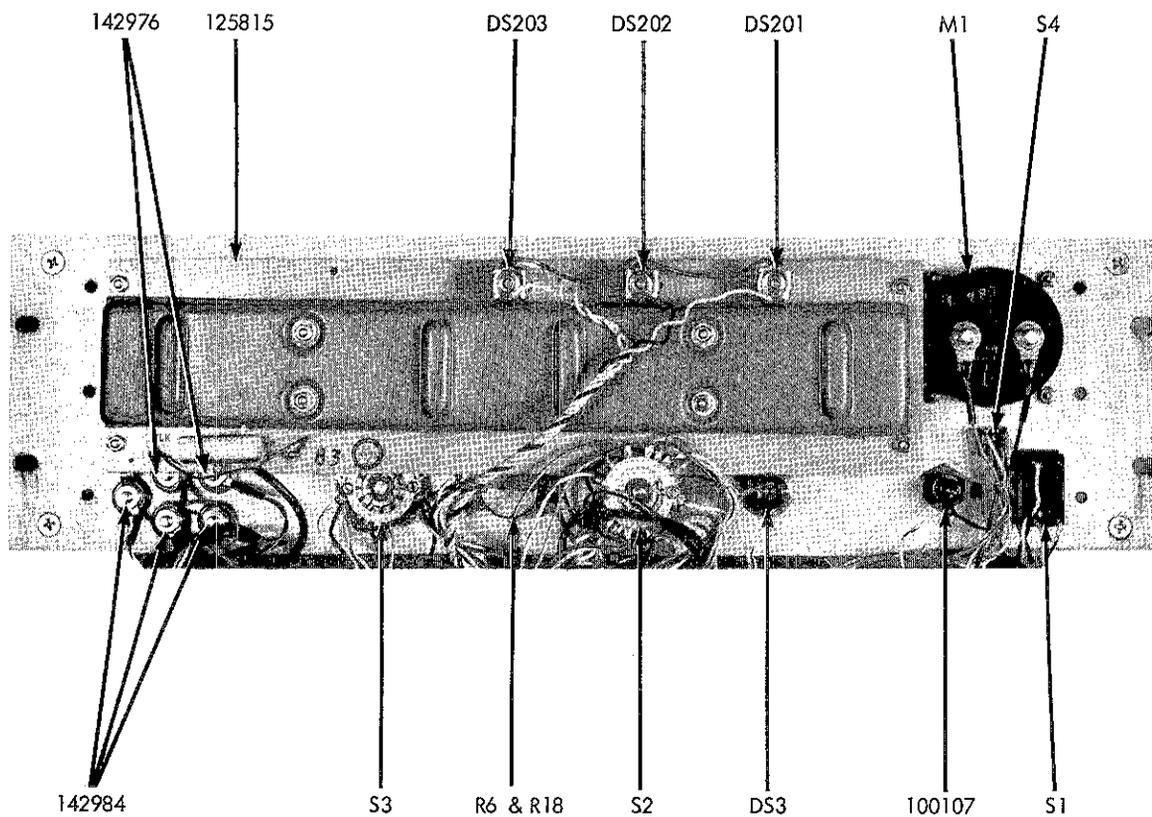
FRONT PANEL ASSEMBLY (sheet 1 of 2)
